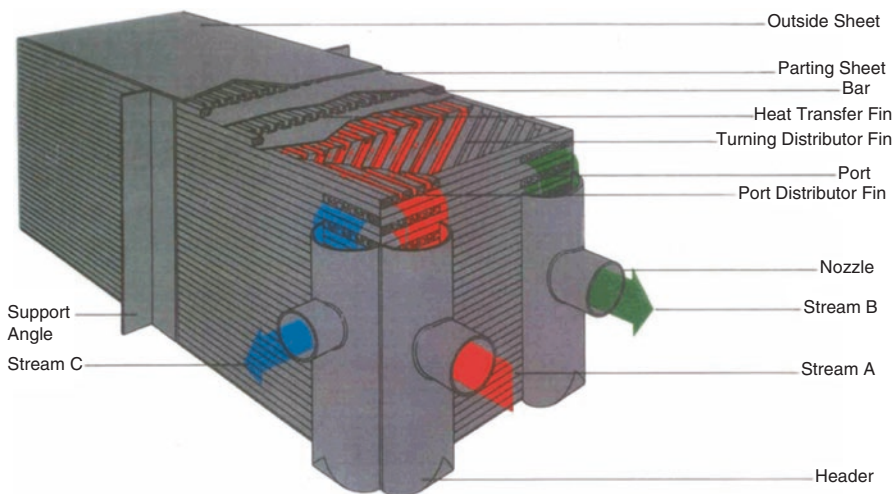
Schematic view of a brazed aluminum plate heat exchanger
